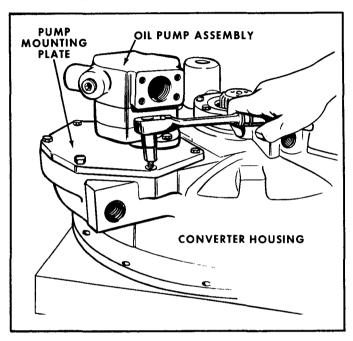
Removing the Pump Mounting Plate from the Converter Housing.
